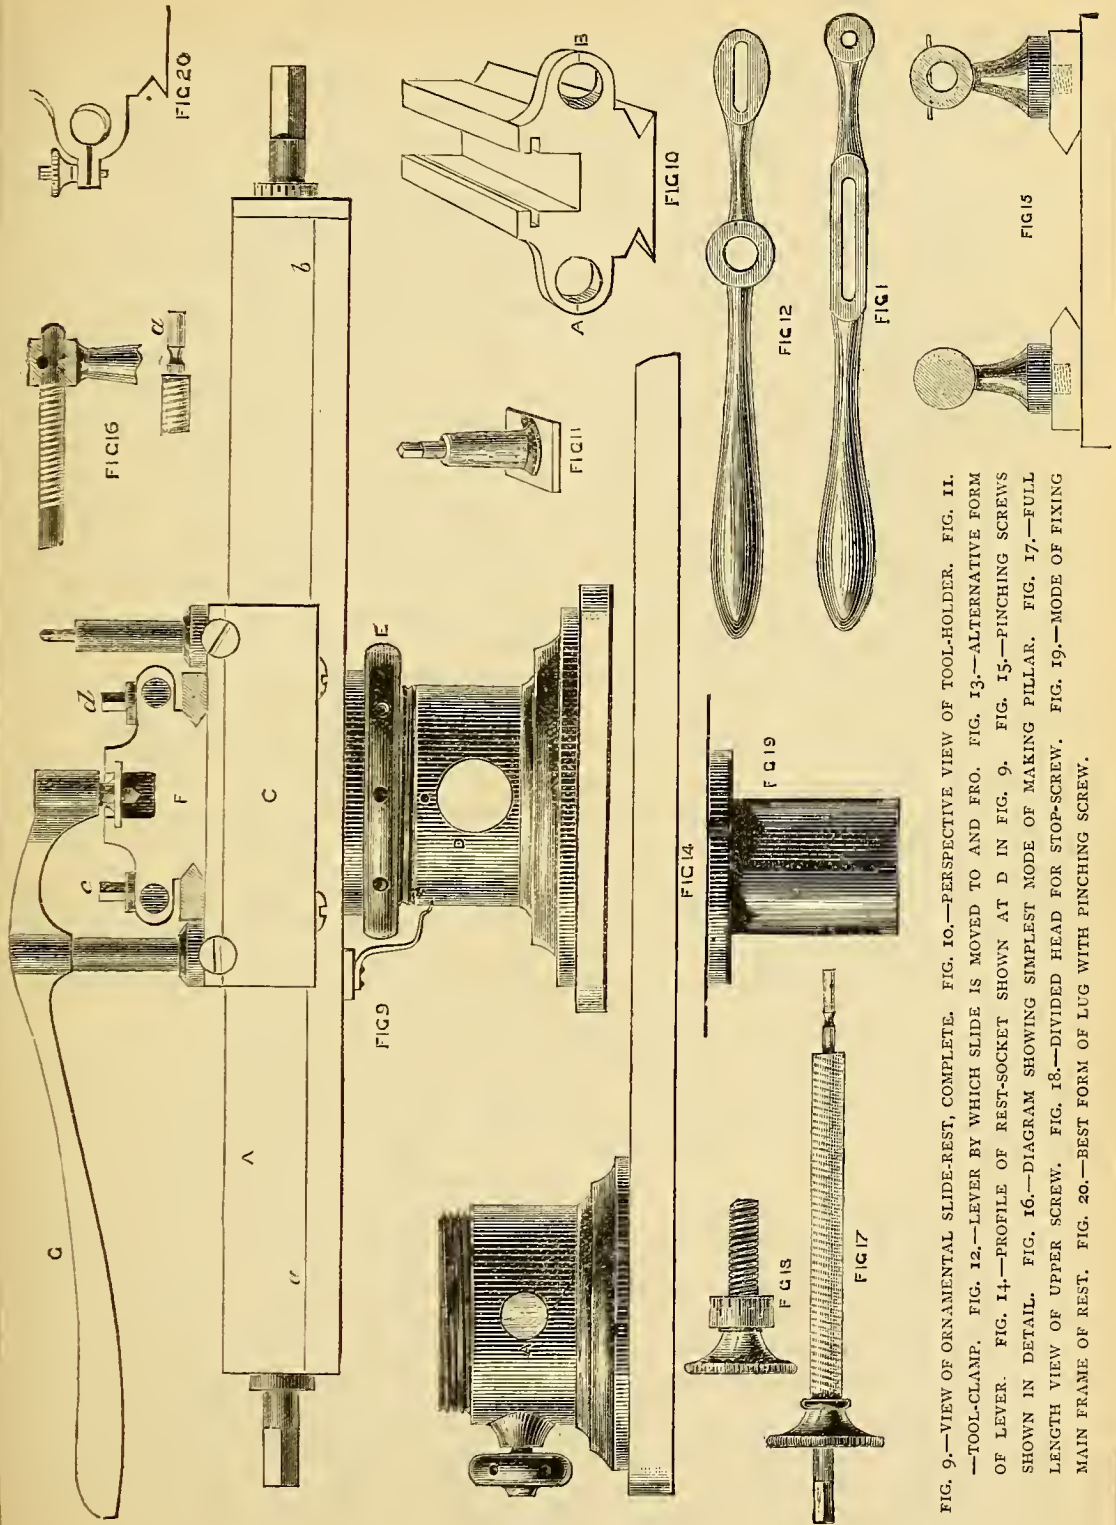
VIEW OF ORNAMENTAL SLIDE-REST, COMPLETE. FIG. 10.—PERSPECTIVE VIEW OF TOOL-HOLDER. FIG. 11.—TOOL-CLAMP. FIG. 12.—LEVER BY WHICH SLIDE IS MOVED TO AND FRO. FIG. 13.—ALTERNATIVE FORM OF LEVER. FIG. 14.—PROFILE OF REST-SOCKET SHOWN AT D IN FIG. 9. FIG. 15.—PINCHING SCREWS SHOWN IN DETAIL. FIG. 16.—DIAGRAM SHOWING SIMPLEST MODE OF MAKING PILLAR. FIG. 17.—FULL LENGTH VIEW OF UPPER SCREW. FIG. 18.—DIVIDED HEAD FOR STOP-SCREW. FIG. 19.—MODE OF FIXING MAIN FRAME OF REST. FIG. 20.—BEST FORM OF LUG WITH PINCHING SCREW.
